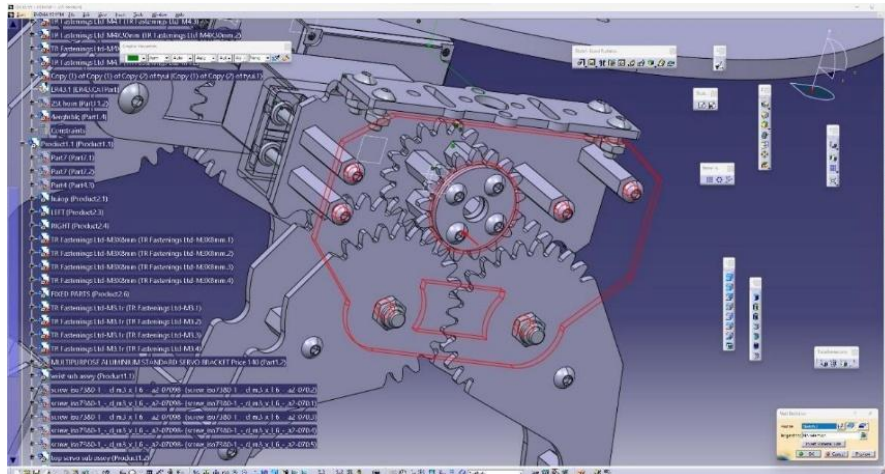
CAD Model of Gear-Driven Robotic Linkage Mechanism
